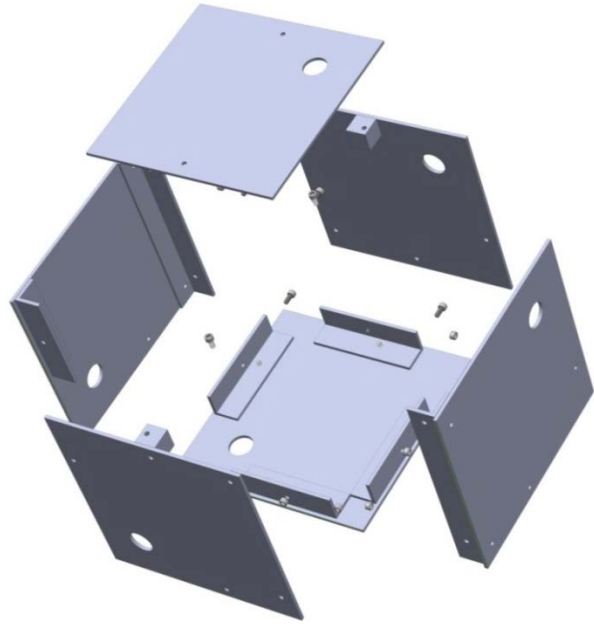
Exploded view of the cube showing the corner brackets and metallic cubes
